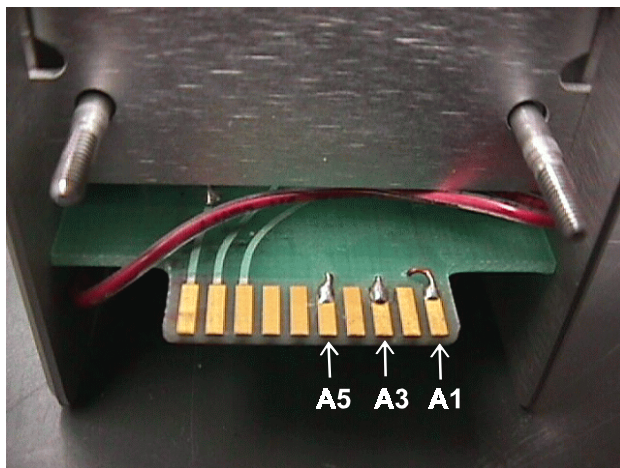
Card edge connector of X-Y Output Module. The wire to tab A1 is used to provided power to an analog to digital conversion device described in Section 8.2.2.2.
